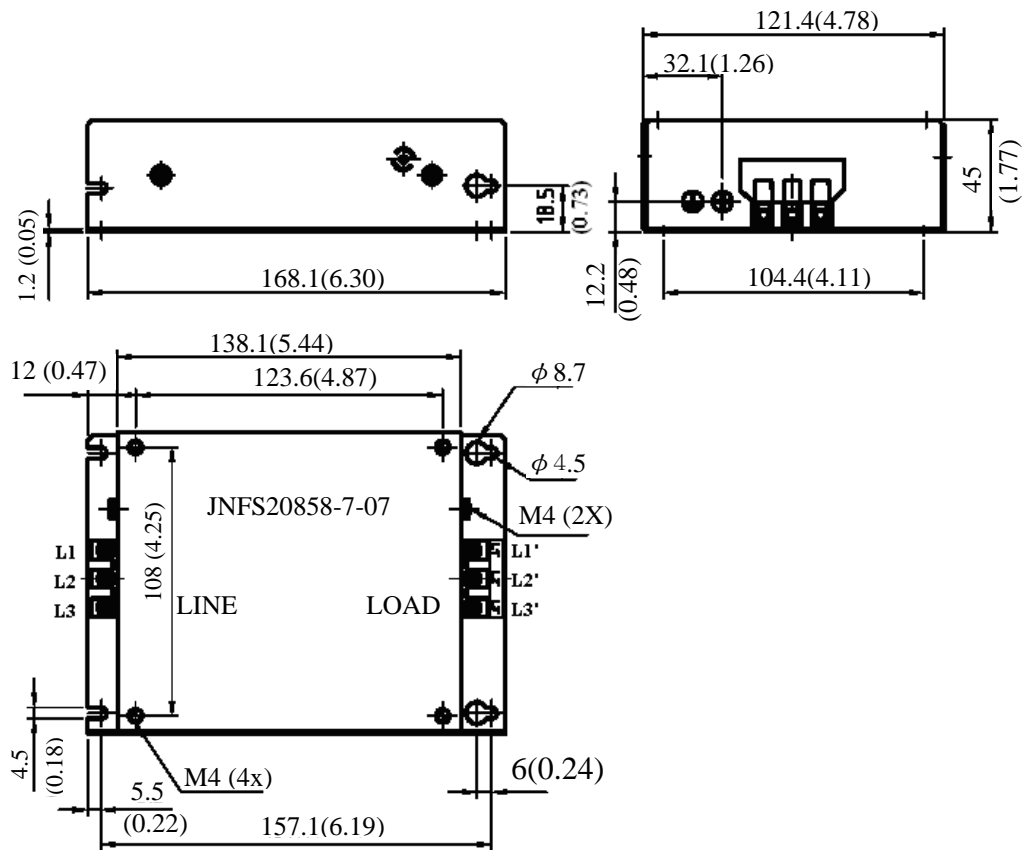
External Filter Dimensions JNFS20858-7-07
